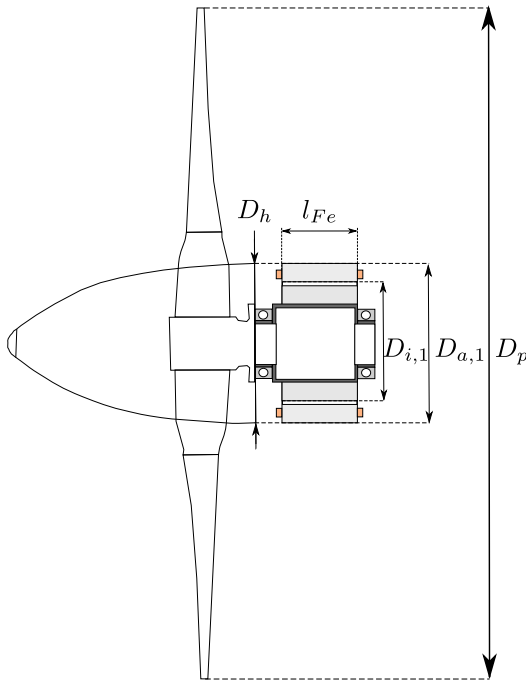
Interfaces between propeller and electric motor showing the geometry.
